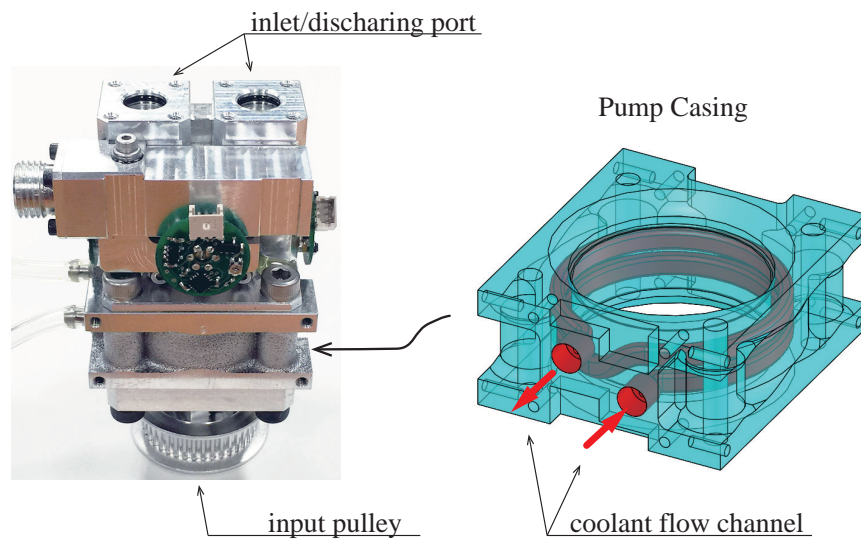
3D printed integrated coolant flow channel in the pump casing.
